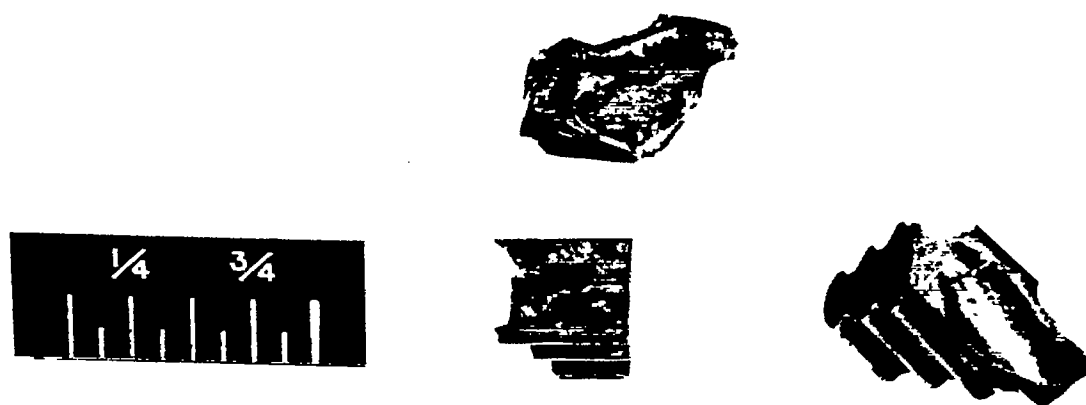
Group 13 tapered-wall sheet-metal blade failure attributed to fatigue.
